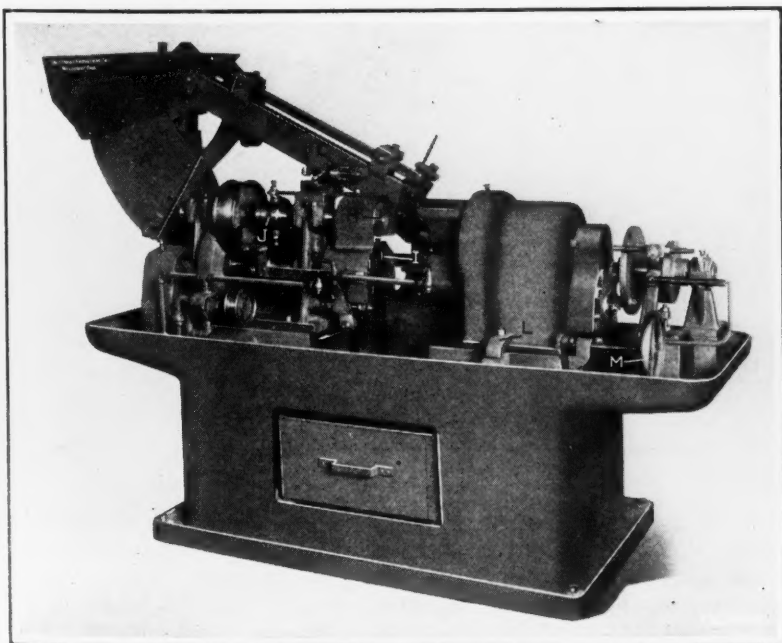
Economy Bolt Pointing and Threading Machine which is fully Automatic
